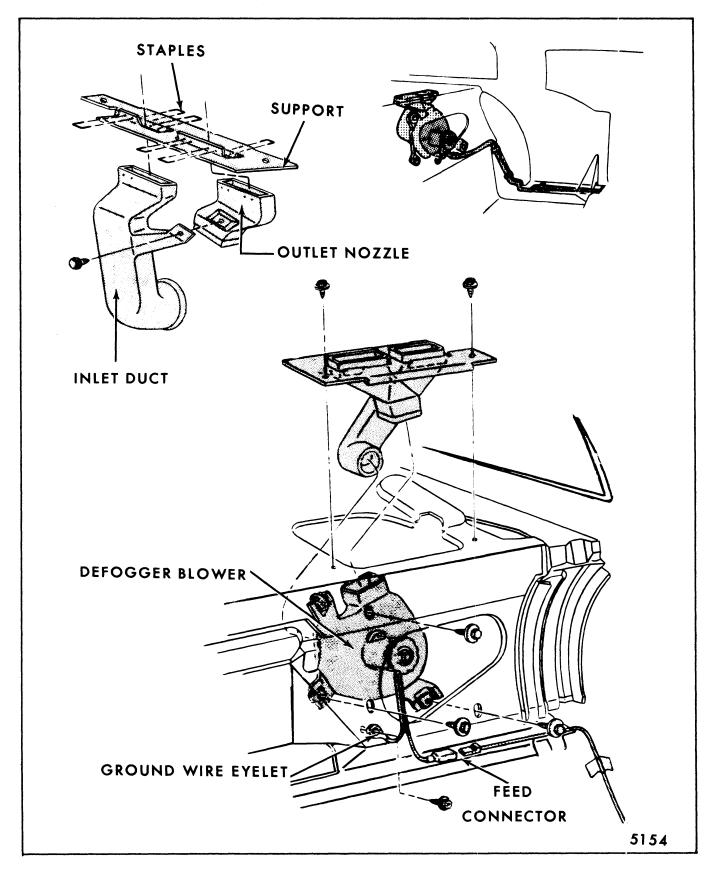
Defogger Blower Installation - Buick "E-87" Style
